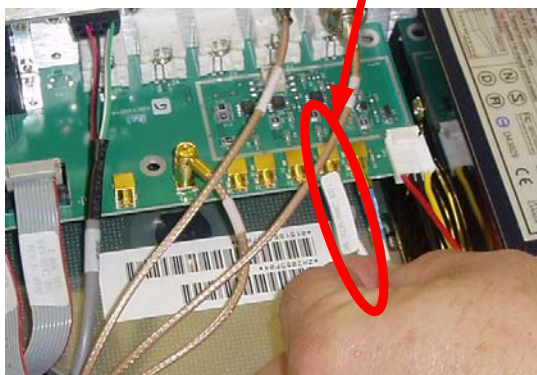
Connect the 10 MHz Cable to J1 on the SRC PCB Assembly
